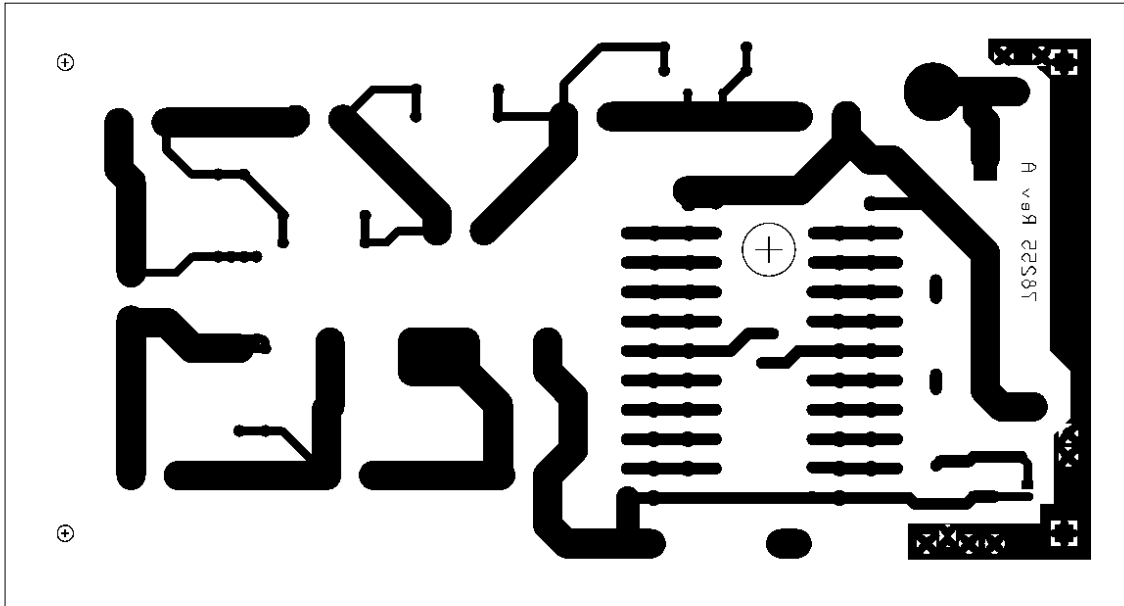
INPUT MATCHING BOARD (ASSEMBLY A6) CIRCUIT TRACE AS VIEWED THROUGH BOARD
